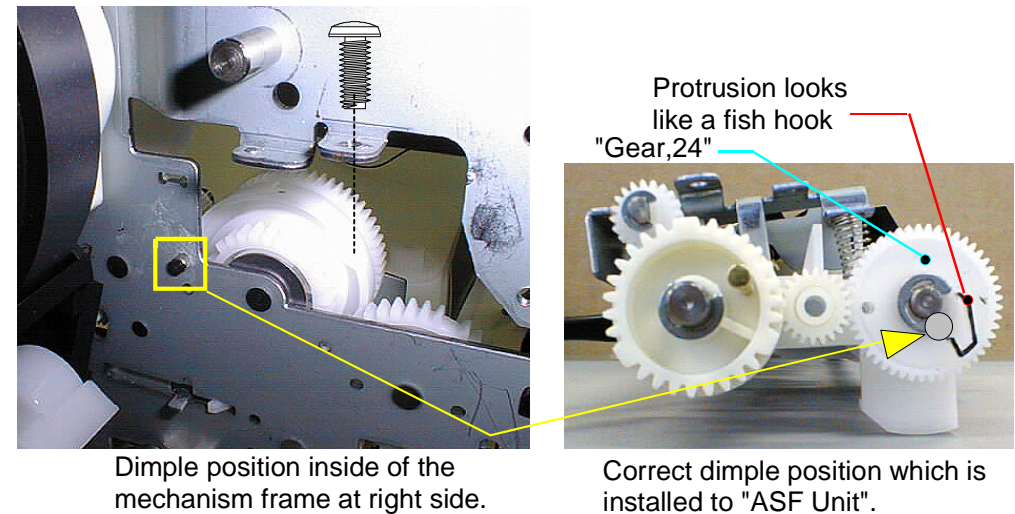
Dimple position to touch "Gear,24" at installing "ASF Unit"
